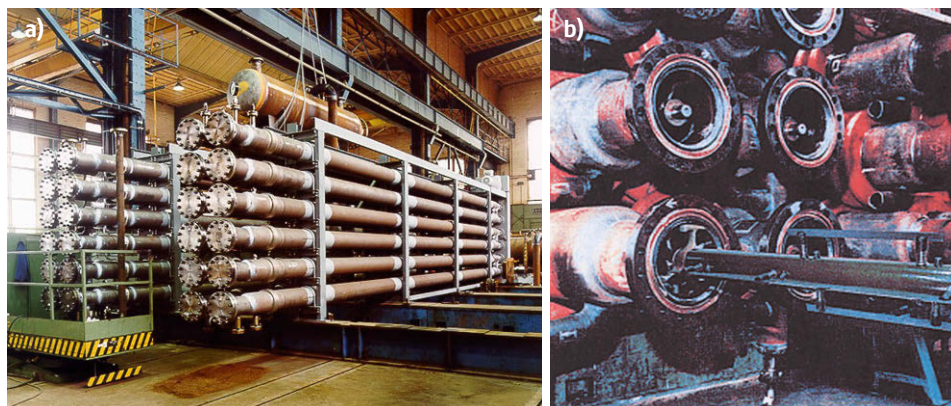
Borsig SSE at the manufacturing site (a). Borsig internals being inserted into the tubes (b). (Photos courtesy of BORSIG)
